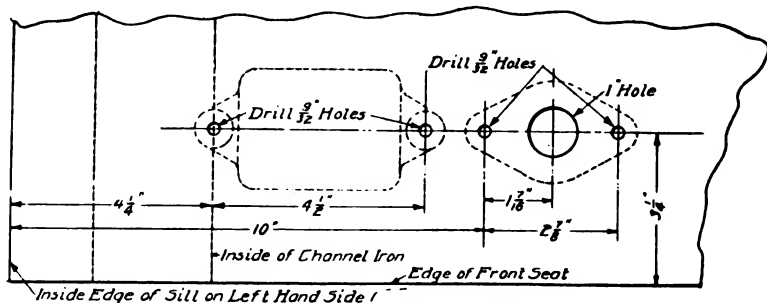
Layout on Under Side of Heel Board for Starting Switch and Cutout
